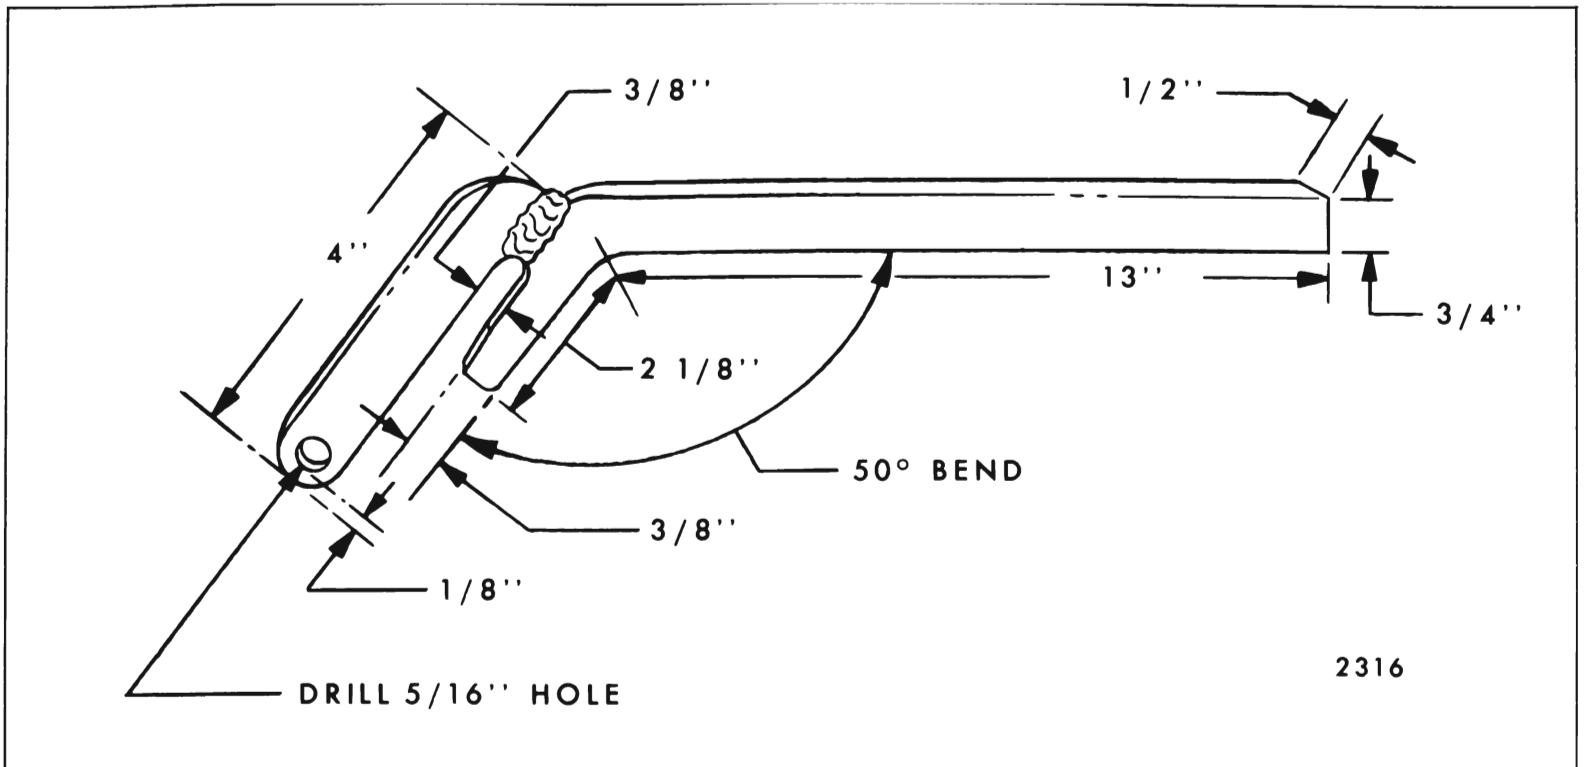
Tool J-22291 "E" Body Torque Rod Adjusting Tool
